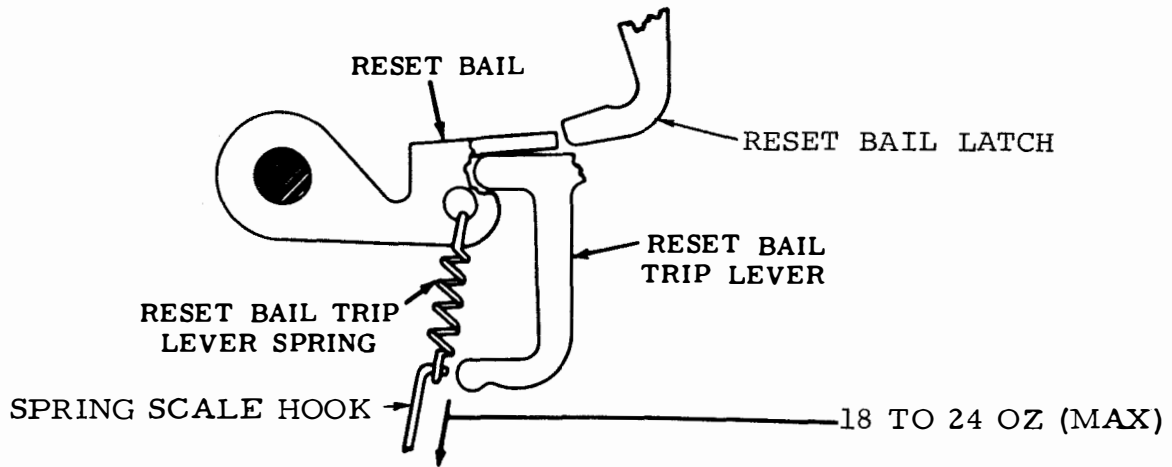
Reset Bail Trip Lever Spring, Reperforator, Front View
